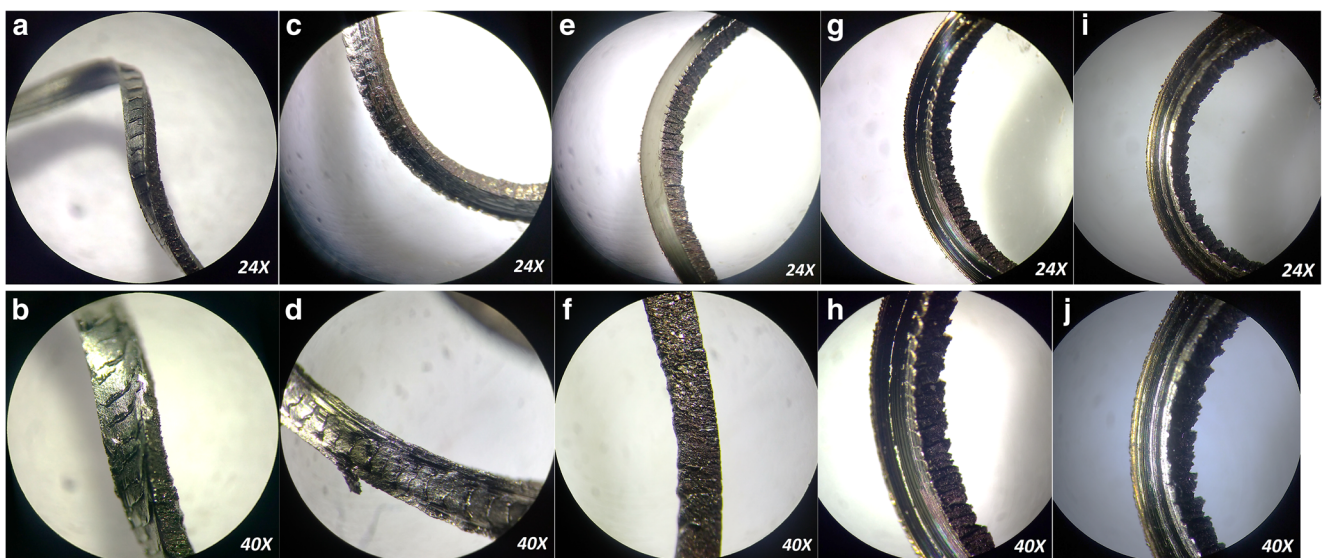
Optical microscopy images (24× and ×40) of AISI 1020 steel chip obtained from cutting test with: a, b uncoated tool, coated tool with bilayer number c, d tool/[HfN/VN]₁, e, f tool/[HfN/VN]₃₀, g, h tool/[HfN/VN]₅₀, and i, j tool/[HfN/VN]₈₀
